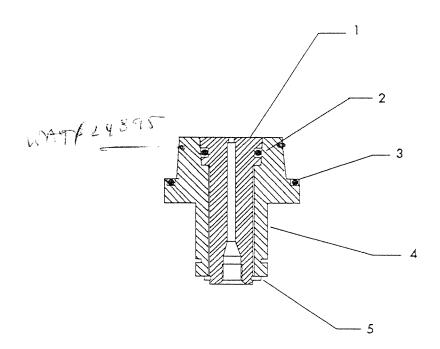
25 mm Lower Connector Assembly (P/N WAT022357)
